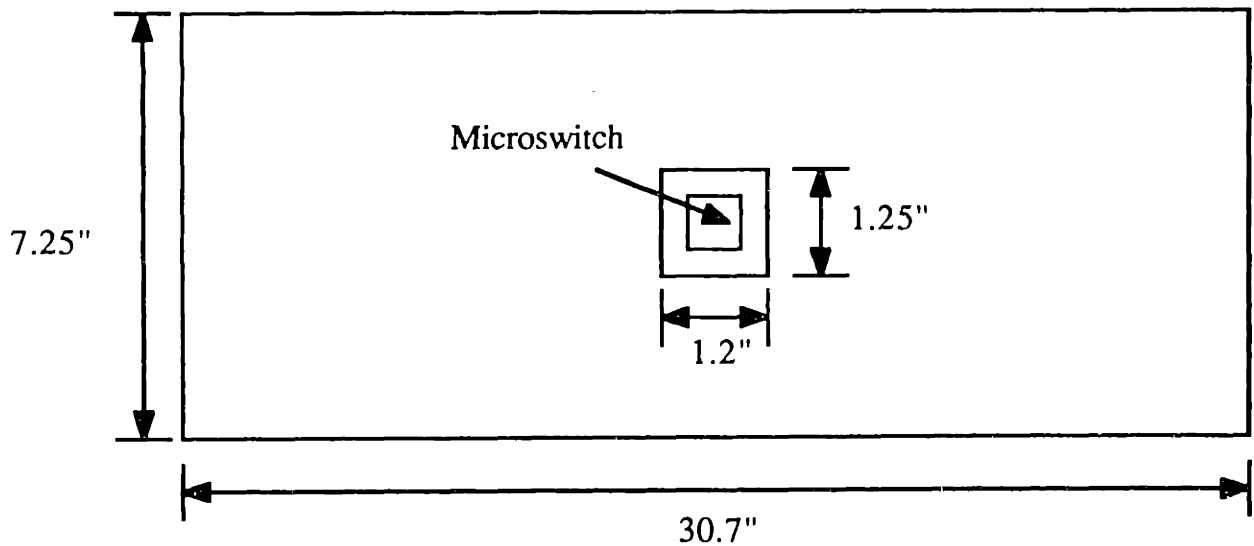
Front View of the Task Board for the Peg-In-Hole Experiments with a Four Sided Hole
